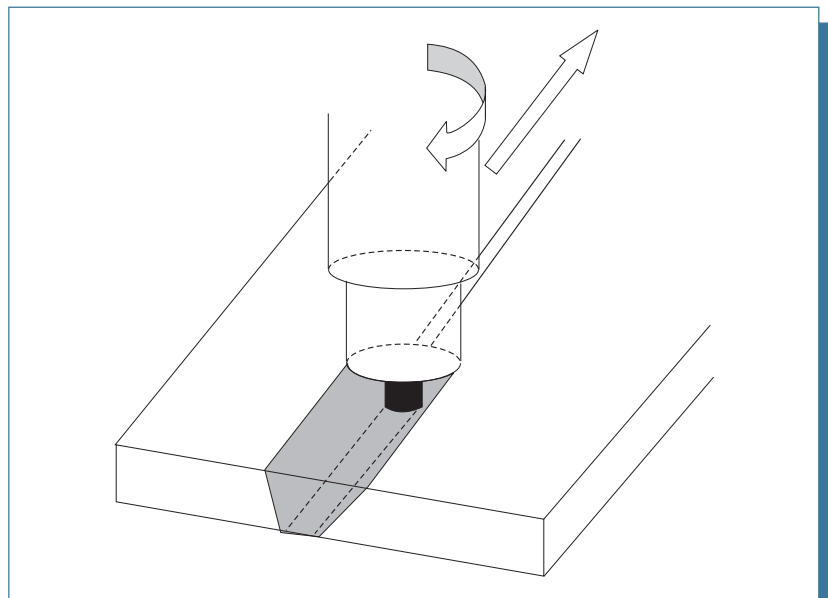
Schematic representation of Friction Stir Welding process. The head of the rotating pin is in black. The grey zone represents the weld
